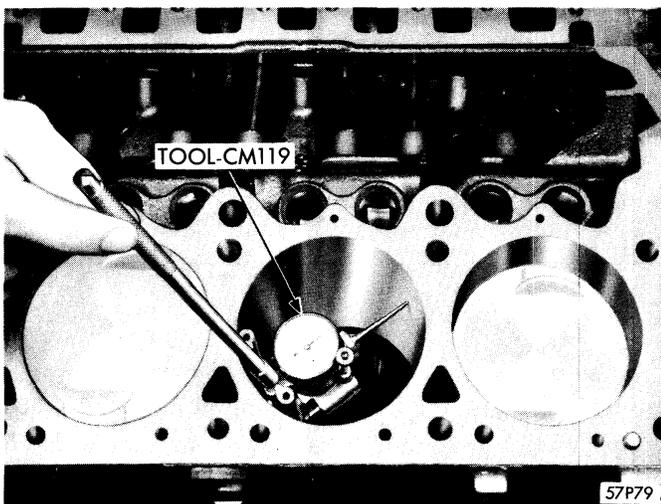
Checking Cylinder Bore for Out-of-Round or Taper
